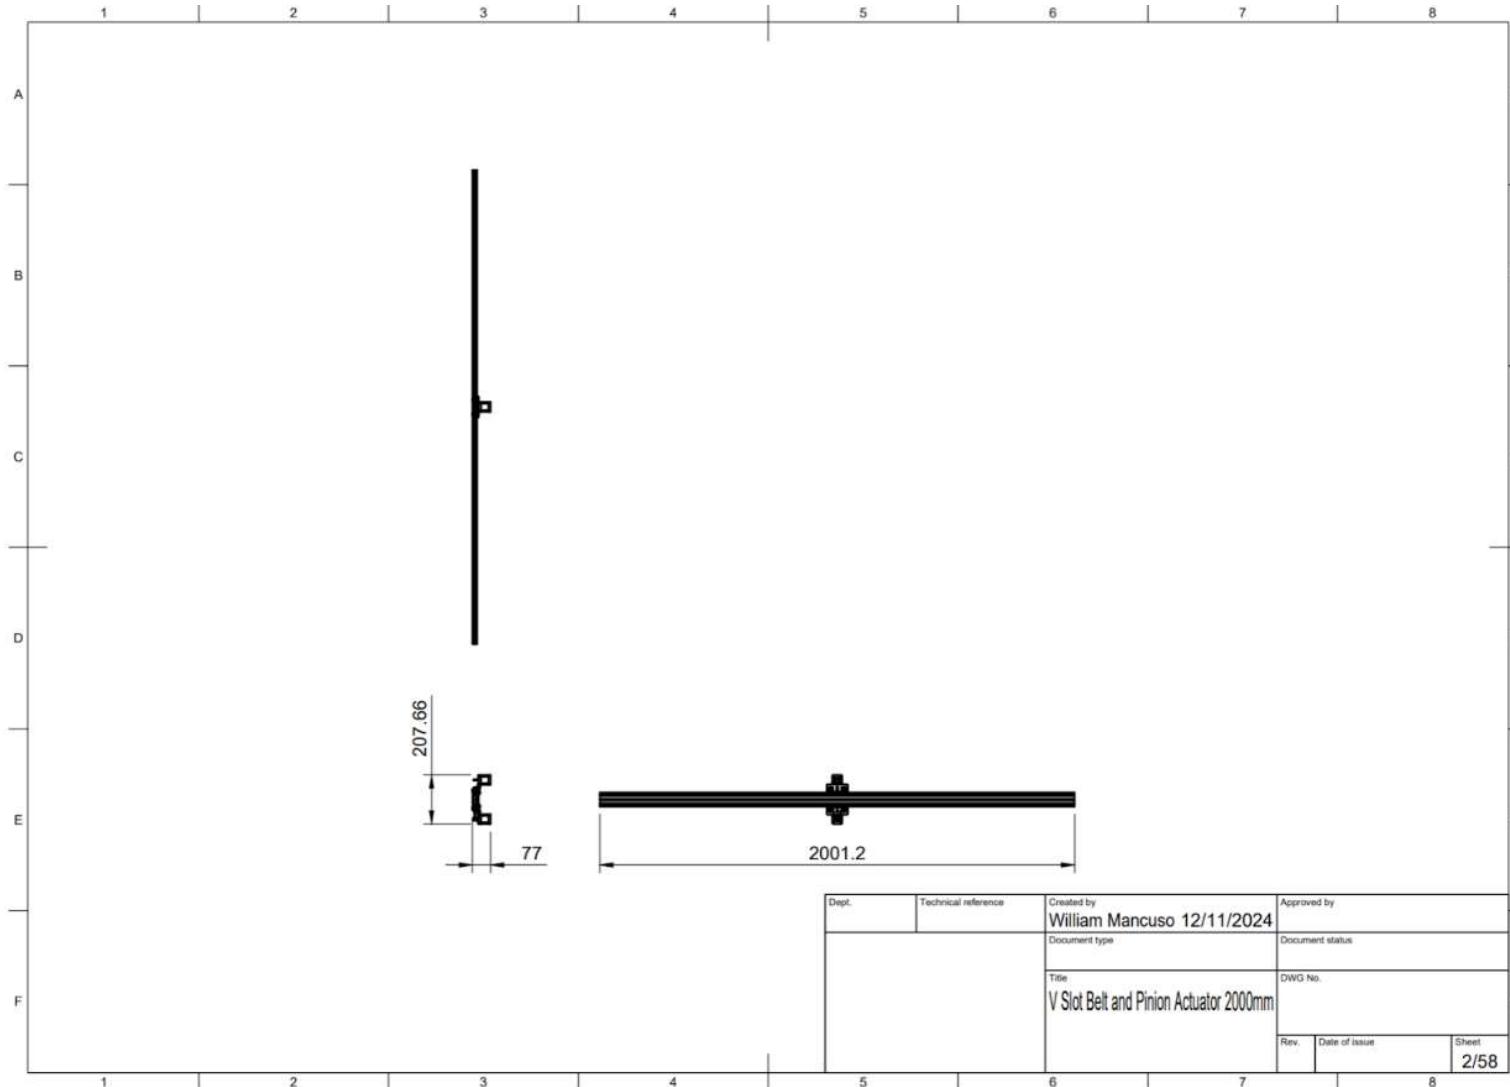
Manufacturing Drawing of part SS#2-P#1- Linear Actuators
